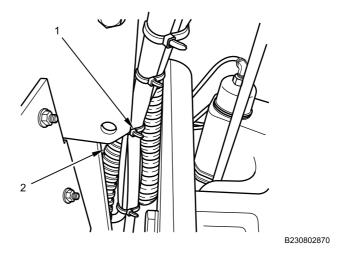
Transfer Case Oil Cooler Return Hose Routing.
